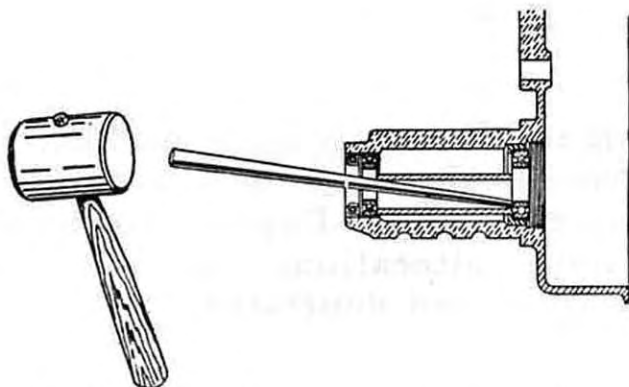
Removing Rear Wheel Ball-Bearing and Seal.
